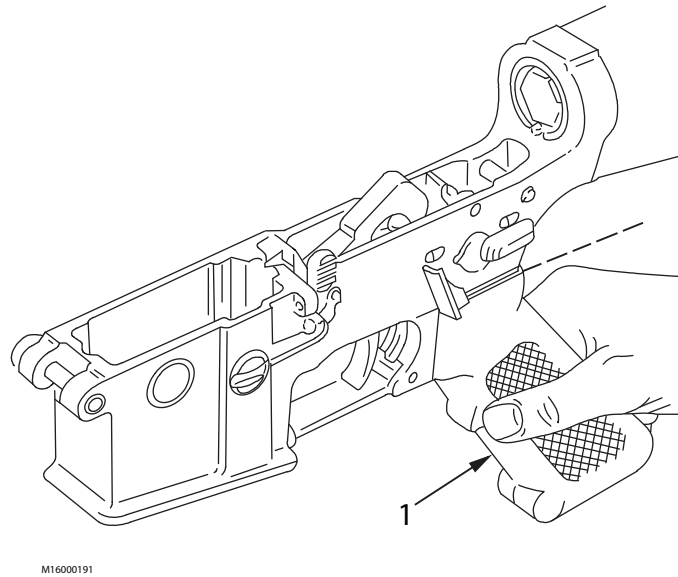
Positioning Pistol Grip with Lock Plate Installed.
